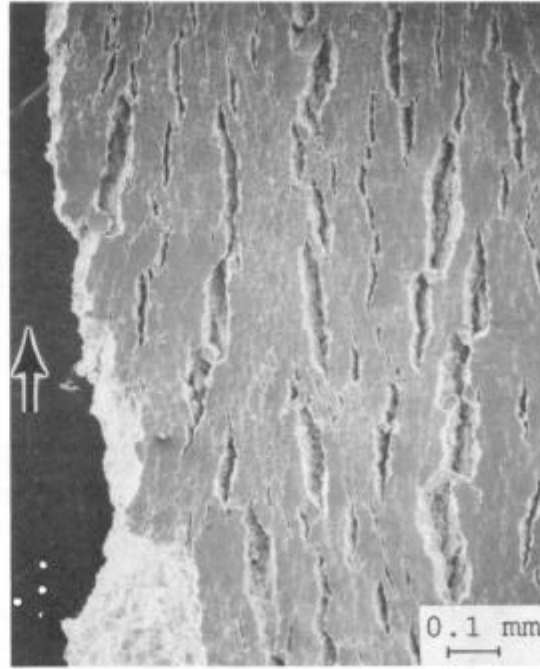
Alloy 718 (aged). CERT tested with dynamic cathodic charging at 200 A/m². Tensile cracking as viewed on the specimen side-surface, below the fracture surface.
